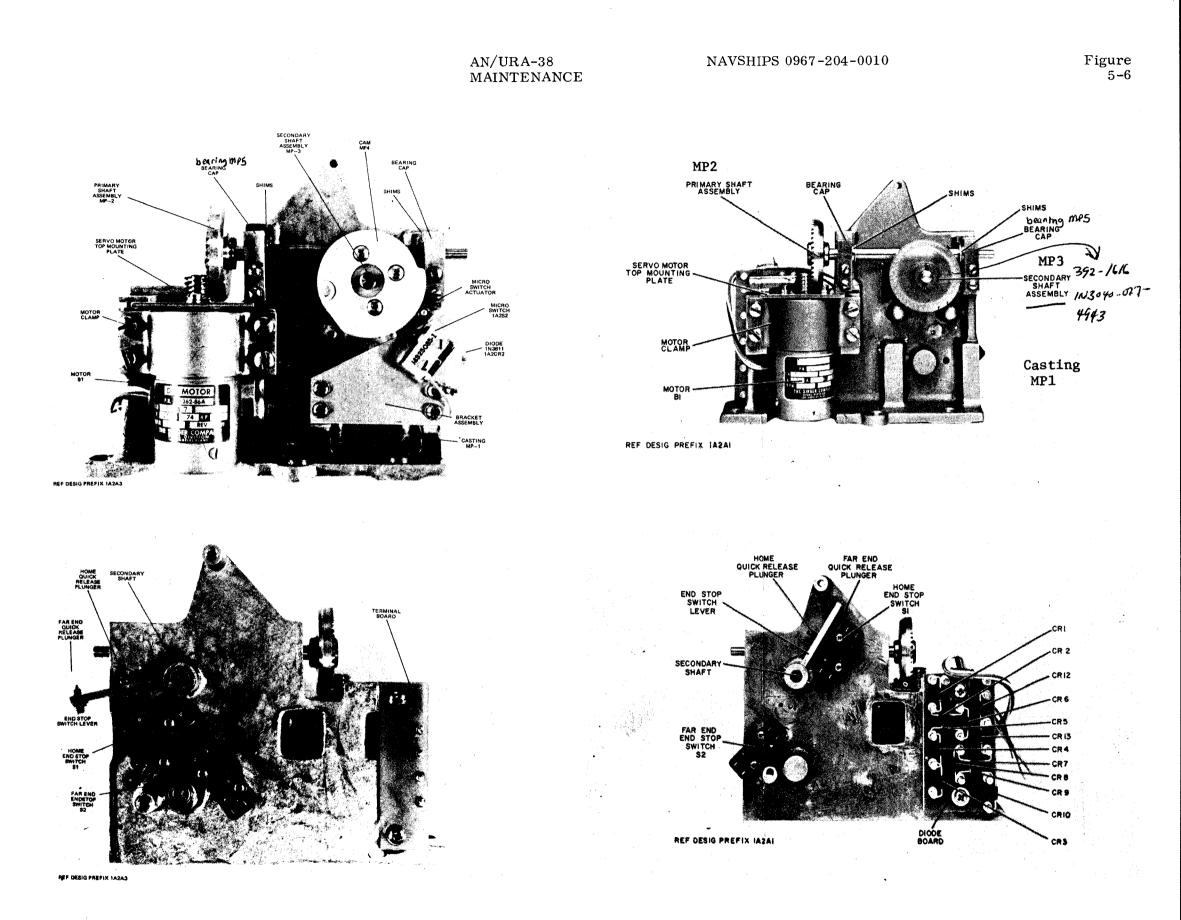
Gear Drive Assemblies 1A2A1 and 1A2A3, Component Locations
